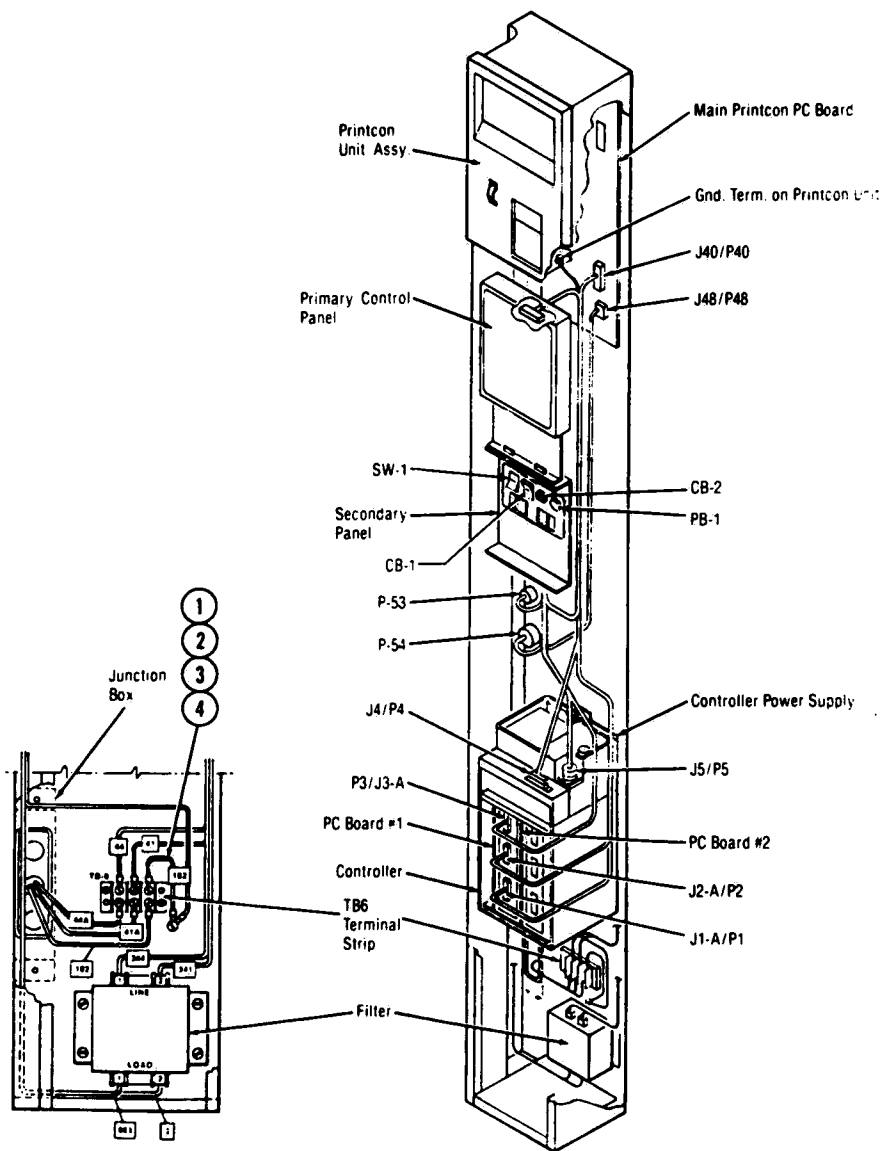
CONNECTION DETAILS, Eagle 2300 Control Column.
